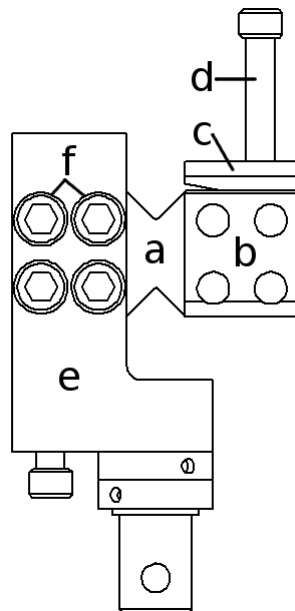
Depiction of the major components of a Combined Loading Shear fixture: specimen (a), face loader (b), edge loader (c), edge loader bolt (d), fixture half (e), face loader bolts (f). The right fixture half was omitted for clarity.
